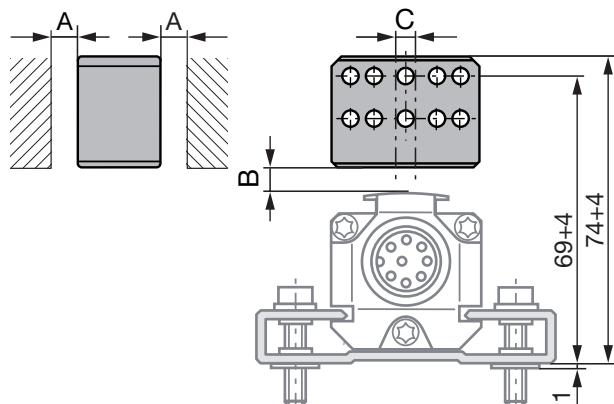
Dimensions and distances with BTL6-A-3800-2 magnet
